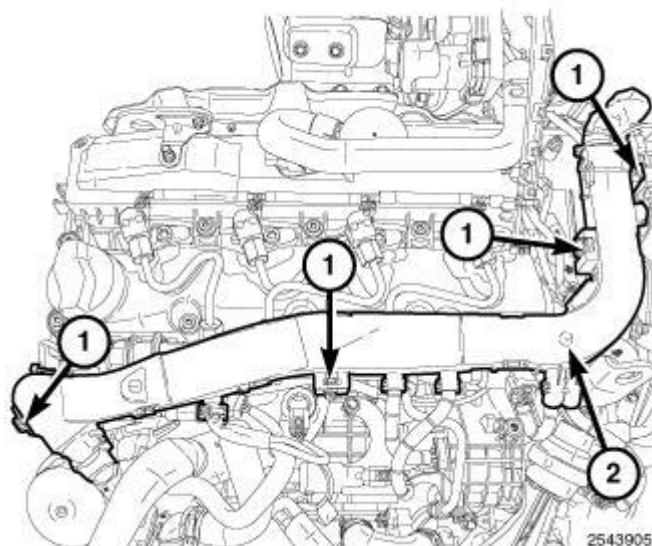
Coolant Temp Sensor & Cooling Manifold Bolts
